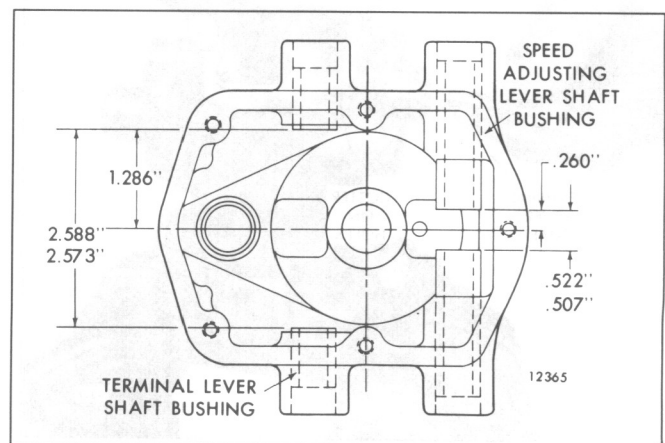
Location of Speed Adjusting Lever and Terminal Lever Shaft Bushings in Governor Housing
